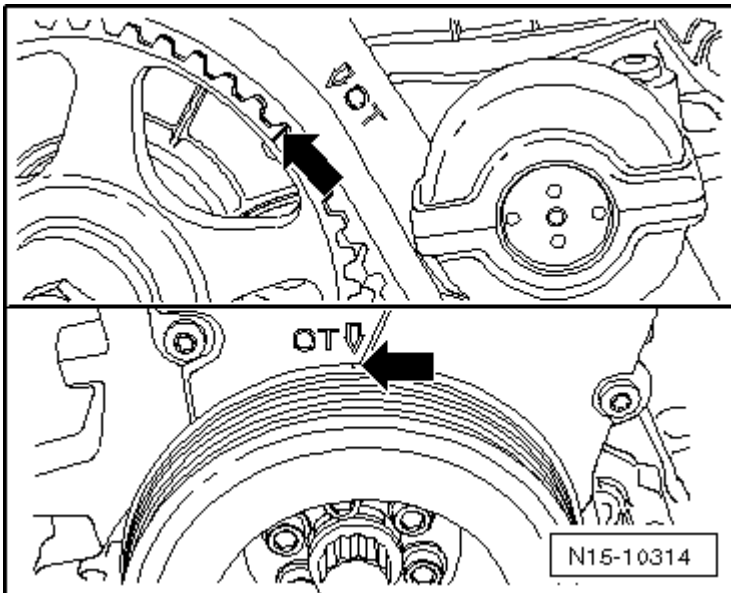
Identifying Camshaft Gear Moved To Marking For TDC Cylinder 1
